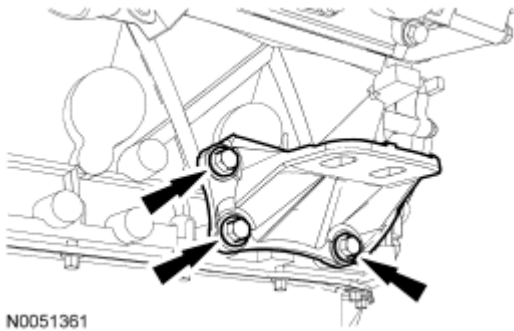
Locating RH Engine Support Insulator Bracket & Bolts
